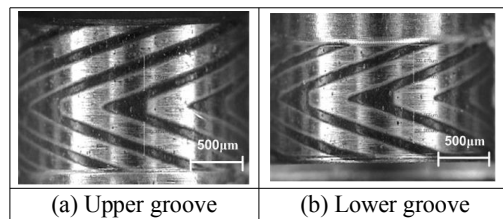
Radial groove shape and specification on sleeve (number of grooves : 8ea, angle : 20°, depth : 15µm)
